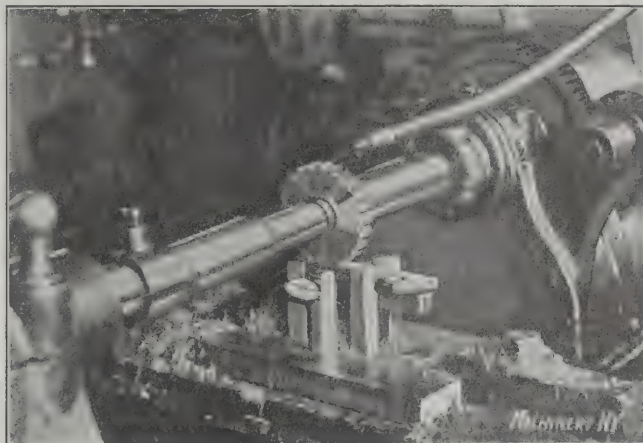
Milling the Slots for the Blades in Cutting-off Tools
